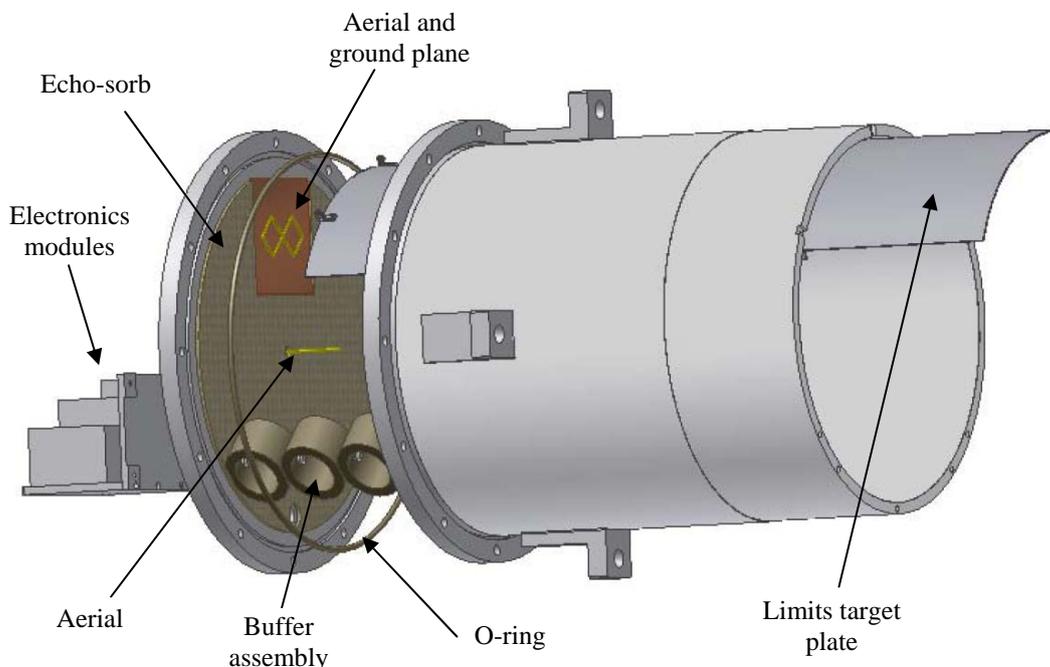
Exploded view of the Far End Plate showing the buffer assembly, the O-ring seal, the aerials, the ground plane and the echo-sorb arrangement.
